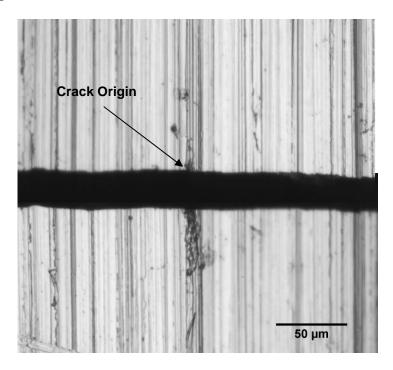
Machining Anomaly on the Surface of a Failed Fatigue Test Plate
